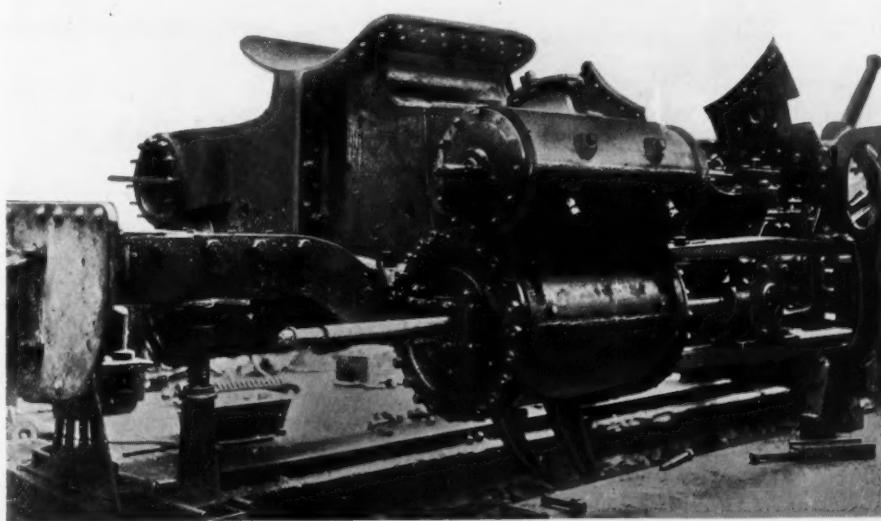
Welded cylinders, cylinder boxing, and smokebox carrier in position
